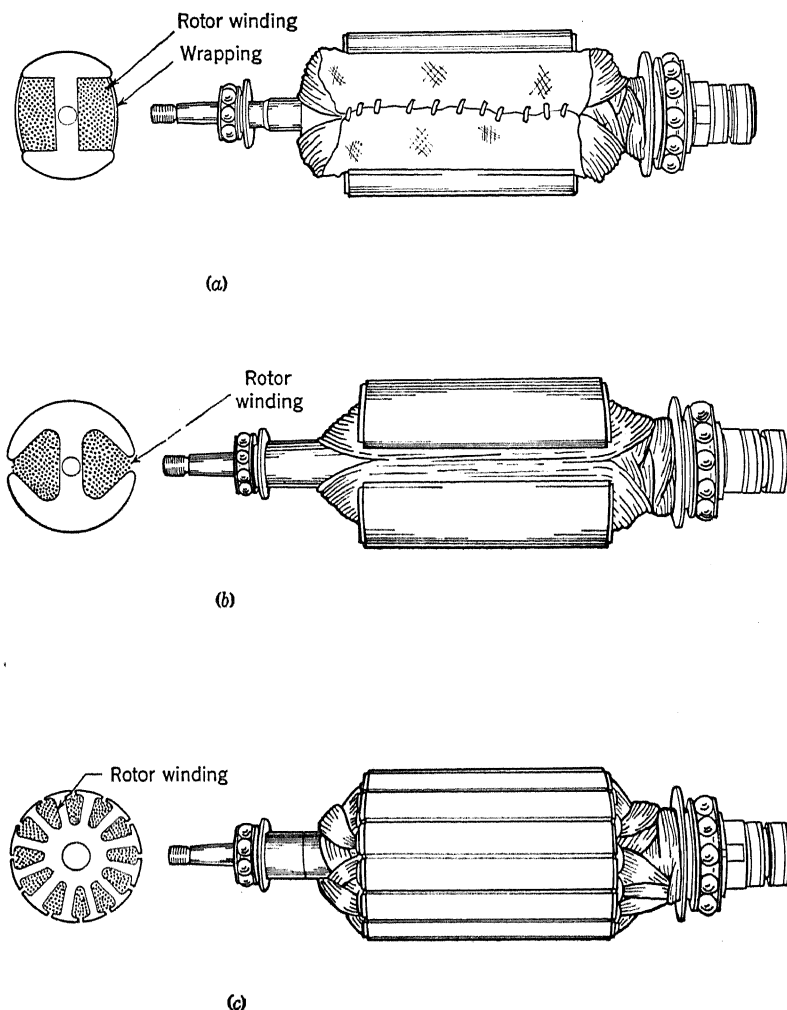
Synchro rotors. (a) Dumbbell; (b) umbrella; (c) drum or wound.
